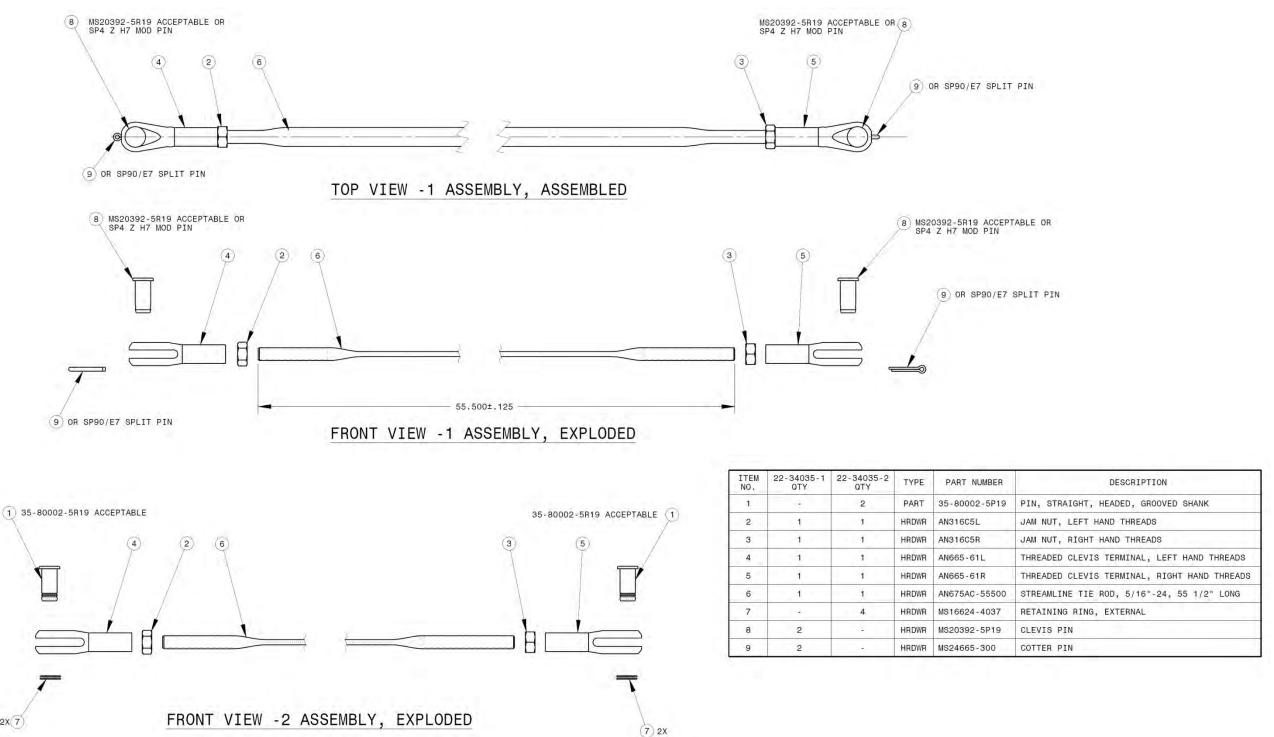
, 22-34038 Tie Rod Assembly [for PA-18 "Wide Body"]
